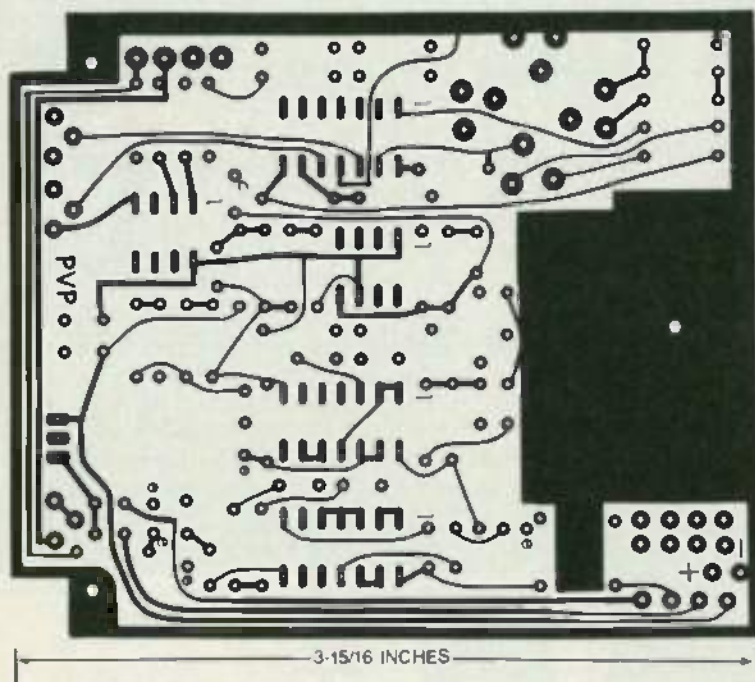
THE FOIL SIDE of the double-sided display PC board is shown here full sized. Its parts-placement diagram will be shown next month.
